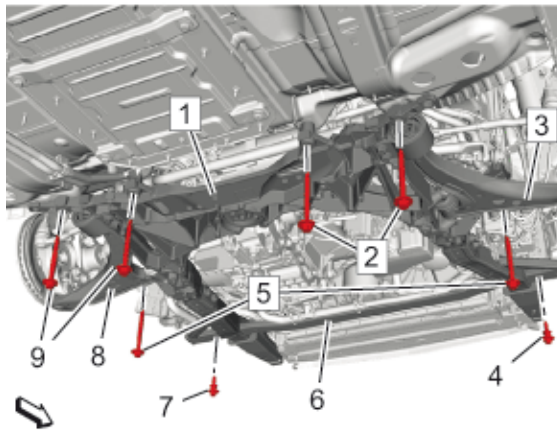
Drivetrain And Front Suspension Cradle, Crossmember Extension And Bolts
